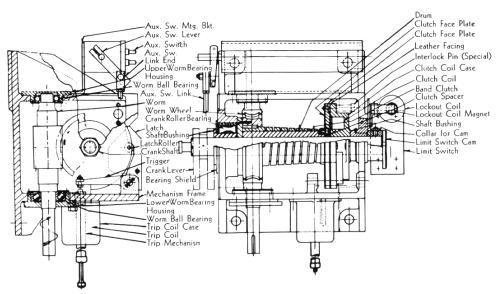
Type BC-1-A Motor Operated Mechanism—Sectional View of Gear and Clutch Unit
